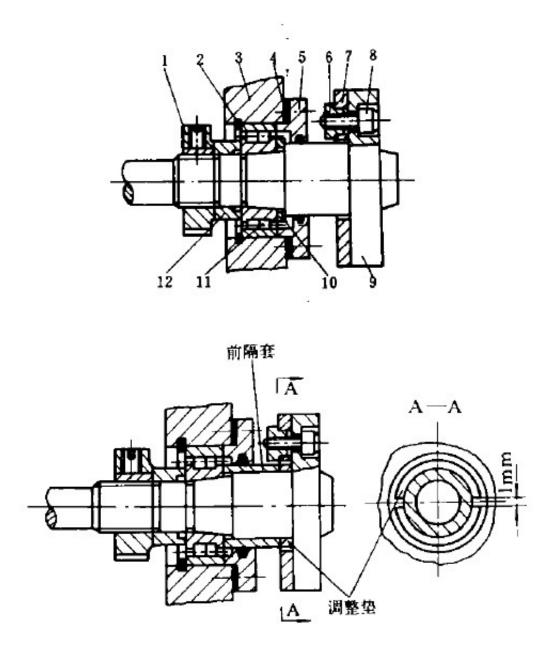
shows the front support structure of a horizontal lathe spindle. As can be seen from the drawings, due to structural constraints, before assembling the spindle box, it is necessary to
